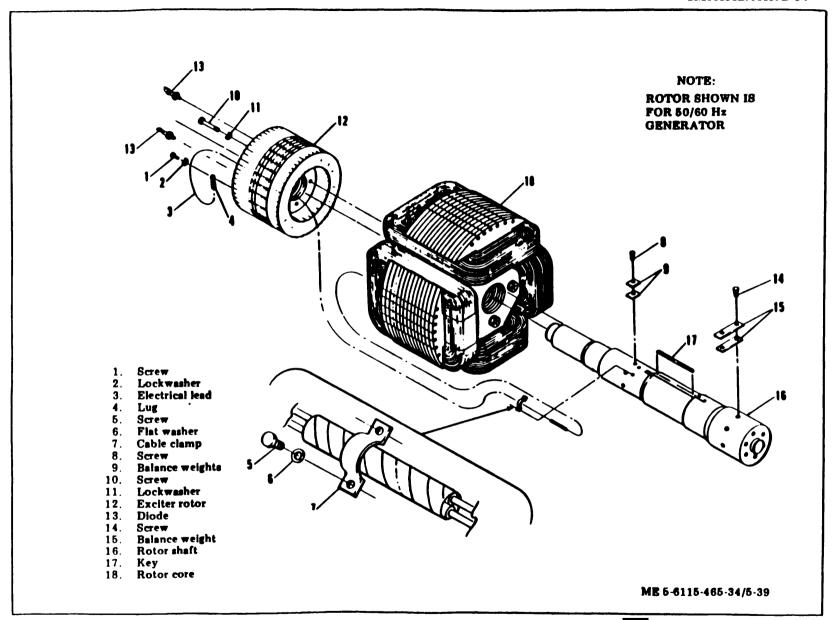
Generator Rotor and Balance Assembly, Exploded View (sheet 1)
